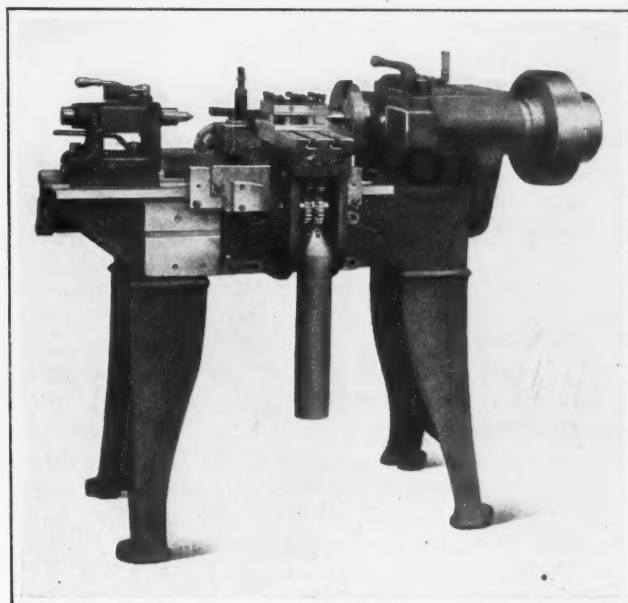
Construction of Facing Attachment mounted on Rear of LeBlond Rapid-production Lathe
